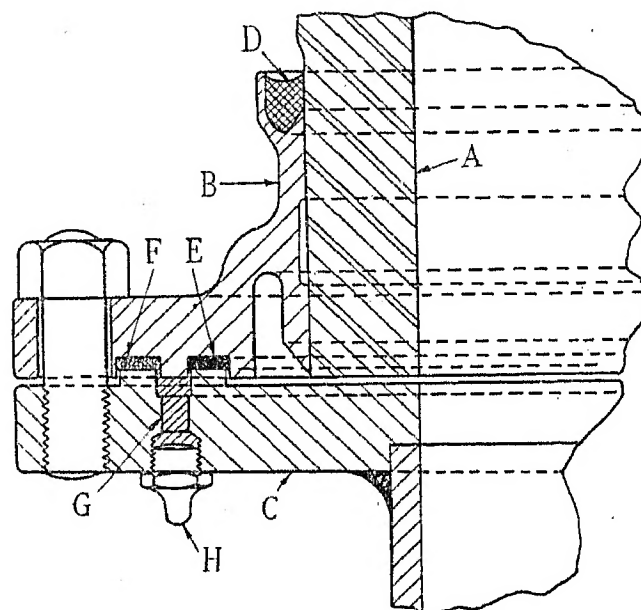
Part cross-section showing flanged joint between porcelain and steel cylinders.
